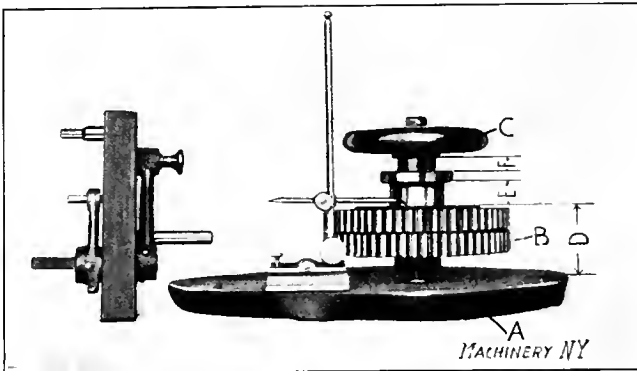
Special Devices used in Assembling the Lathe Apron shown in Fig. 3
